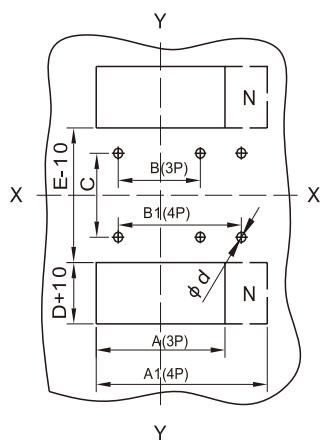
Plug-in rear wiring installation board hole-opening dimensions
